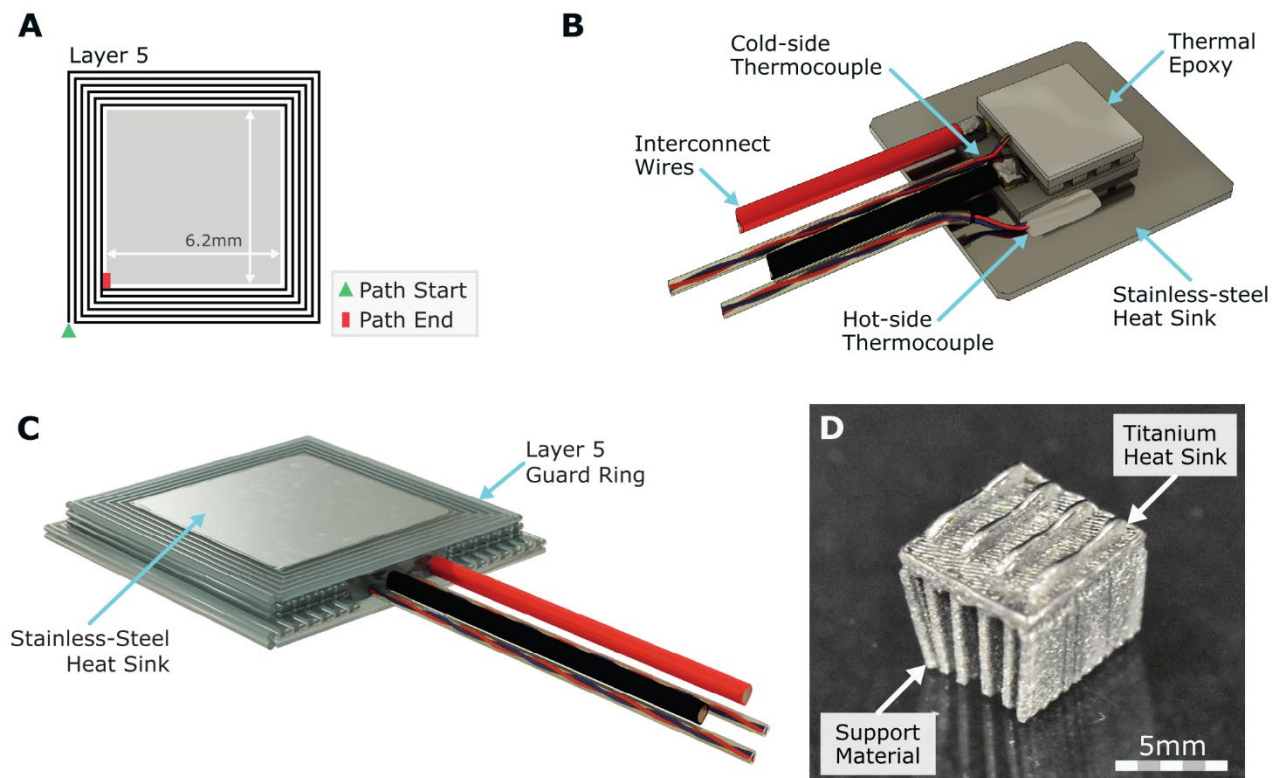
Stainless-steel Heat Sink for the Interface Version 3.
